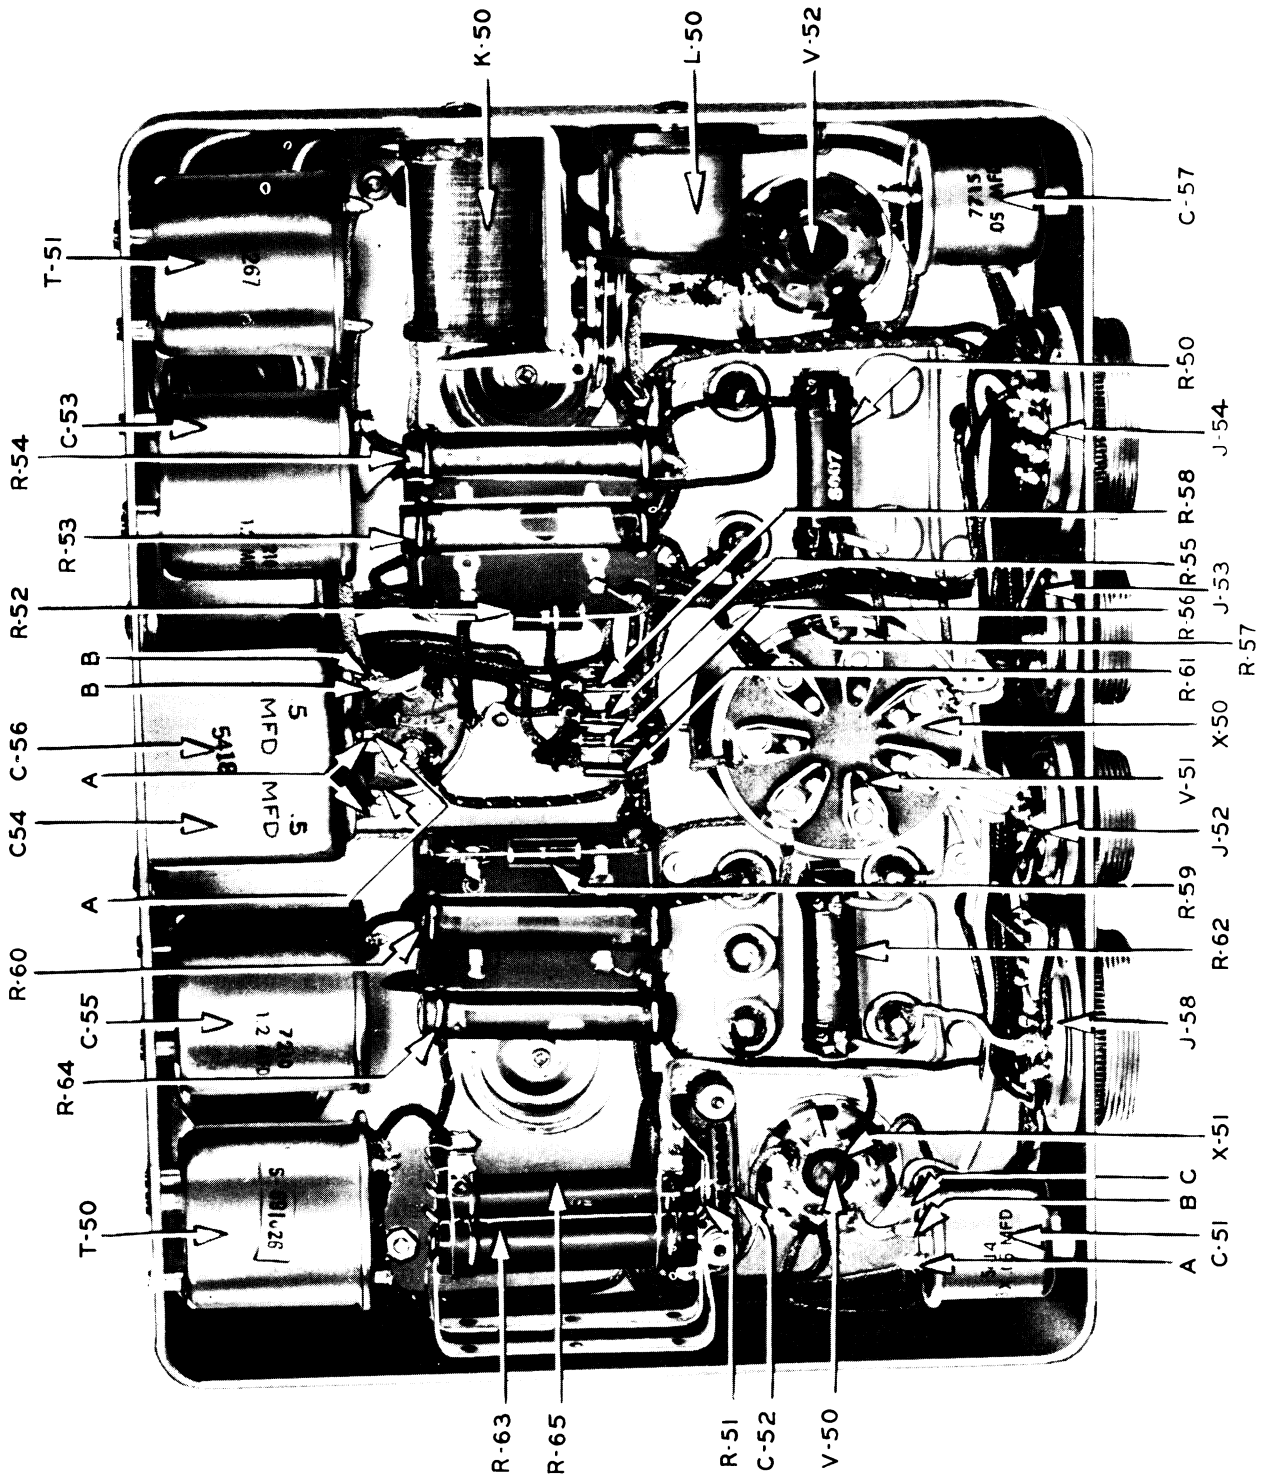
MODULATOR UNIT BC-456-B, BOTTOM VIEW WITH COVER REMOVED
